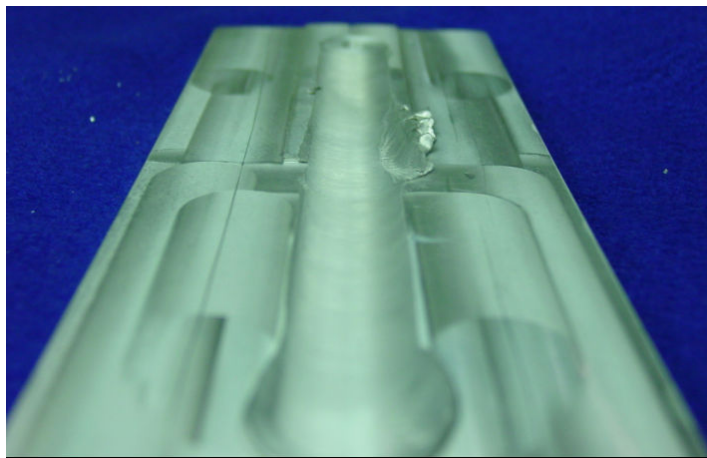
Welding with force control over a 1 mm step.
